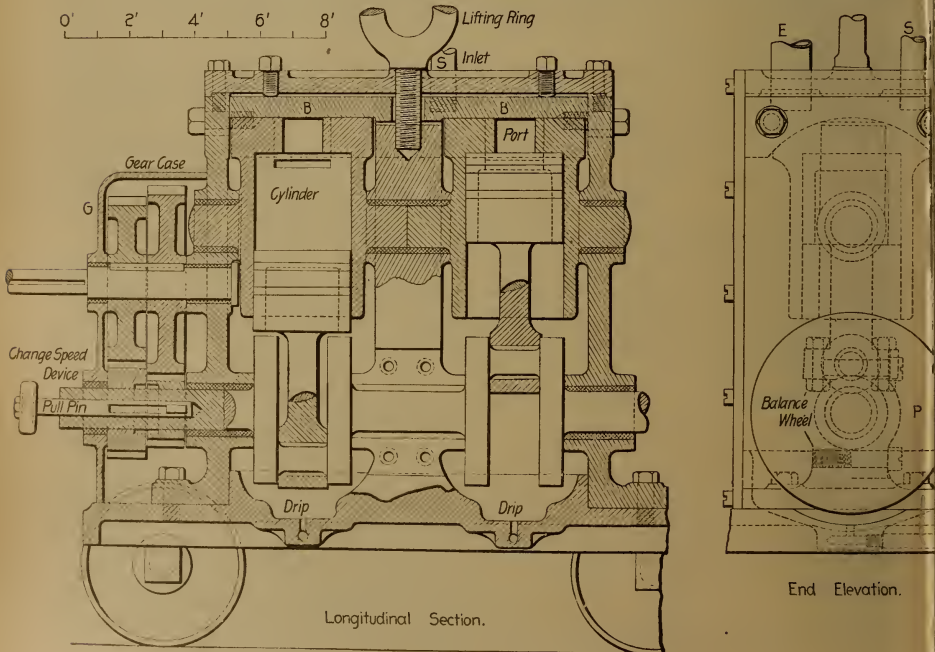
DETAILS OF COMPRESSED AIR ENGINE.
